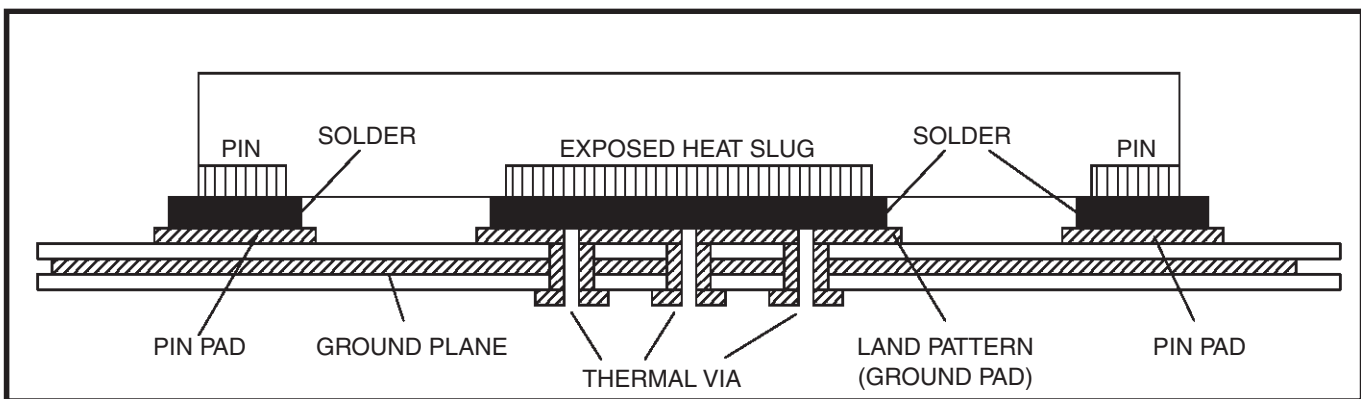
P.C. Assembly for Exposed Pad Thermal Release Path – Side View (drawing not to scale)
